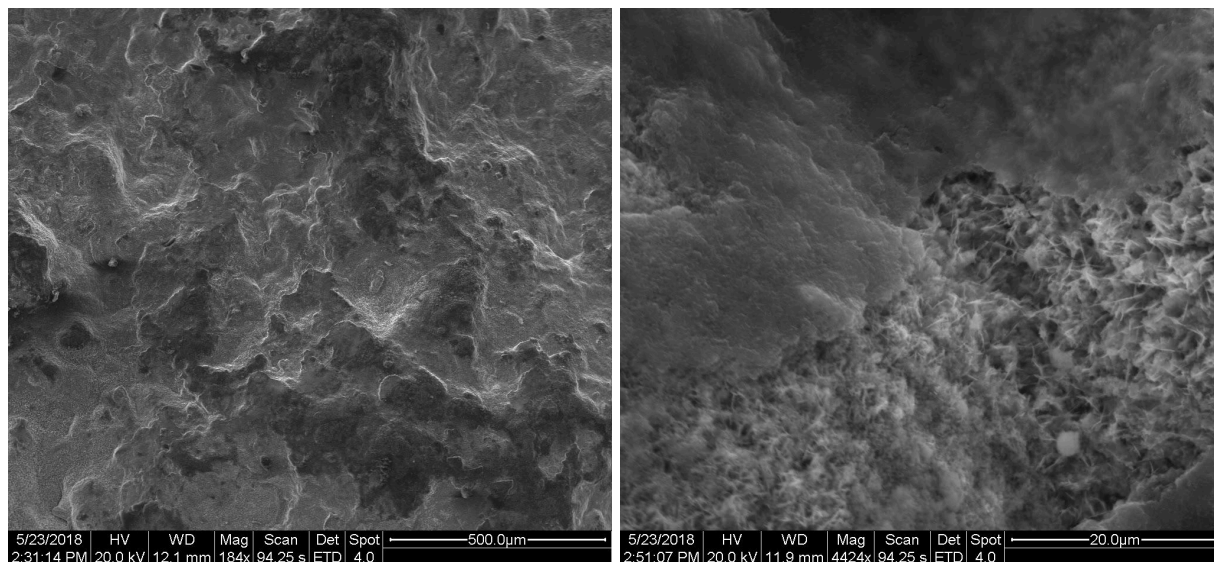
Worn fracture surface shown on the left. Right image shows combination of worn and flakey fracture surfaces.
